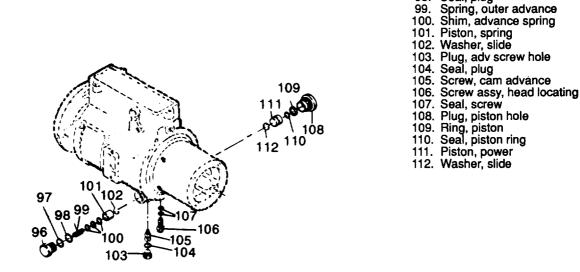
Fuel Injection Pump, Exploded View (Sheet 5 of 7)
